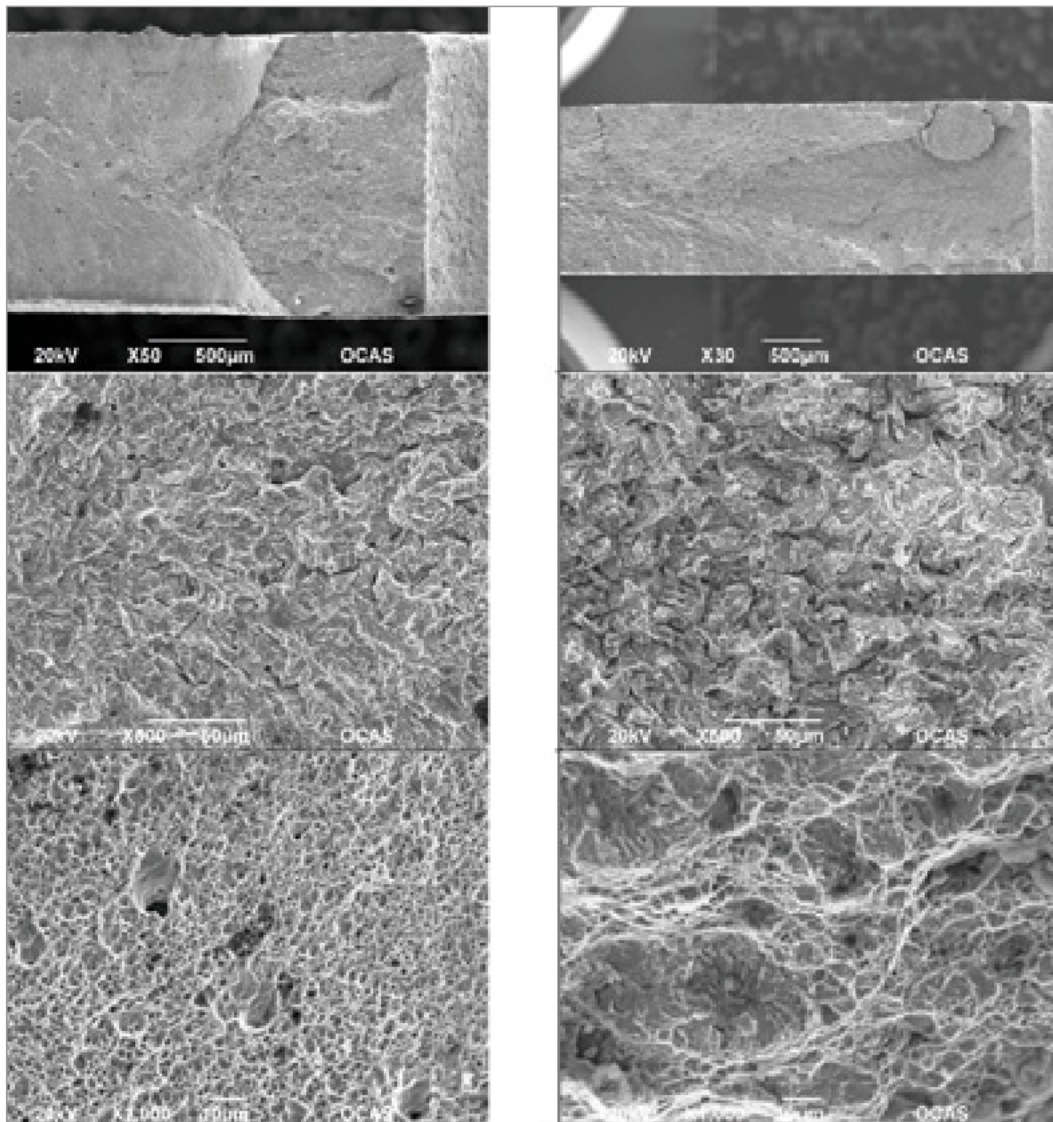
Fracture surfaces as observed on broken samples. Left images correspond to the sample tested at 850 MPa, broken after 3.4 minutes. The right column shows the fracture surfaces of a sample tested at 600 MPa, that broke after 844 minutes. The top image is an overview image with the notch being situated at the right side of the image. The middle image illustrates the fracture surface just below the notch root, whereas the bottom images correspond to the middle of the sample.
